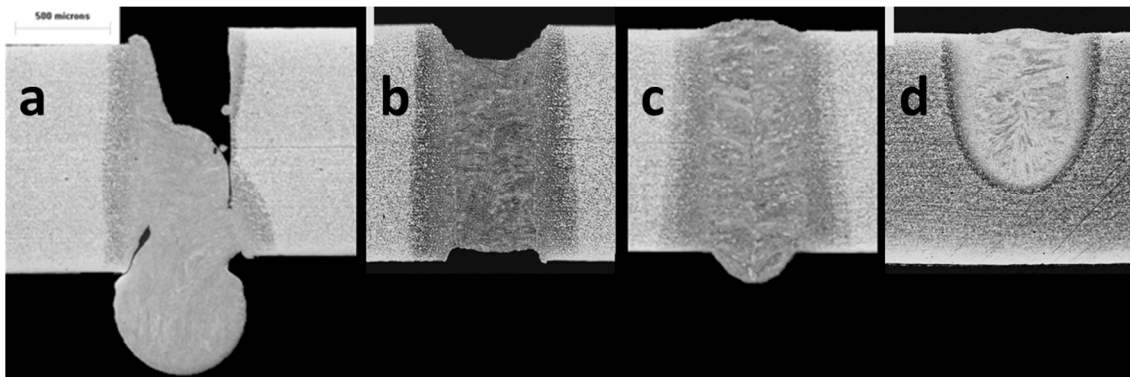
Weld profiles of typical geometries observed a) humping b) concavity c) convexity d) incomplete penetration
